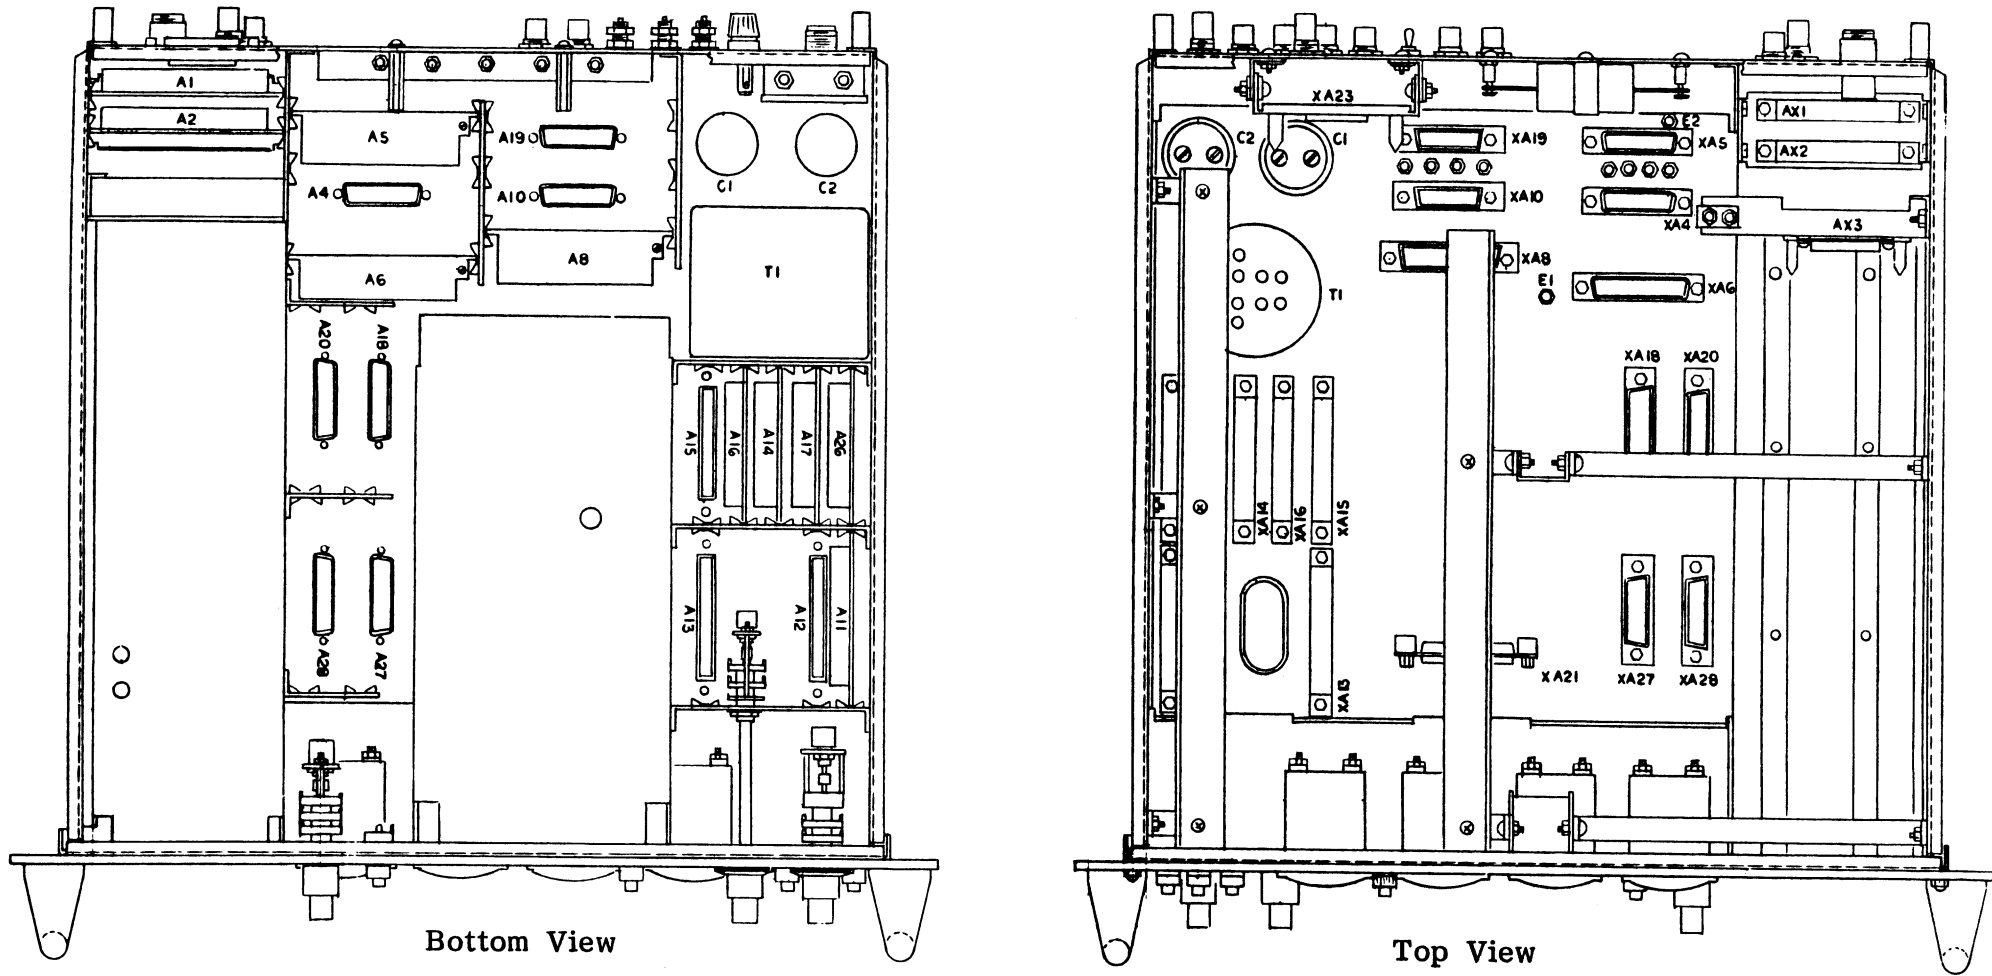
Top and Bottom Views of Chassis with Cover Removed
